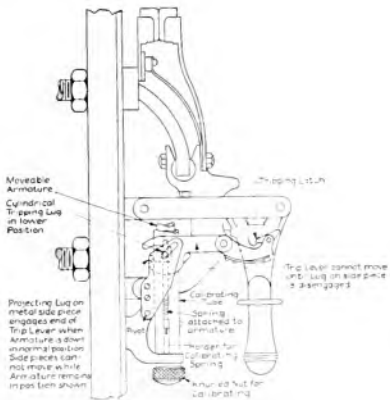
B. Partial View of Breaker Mechanism showing Breaker Closed
